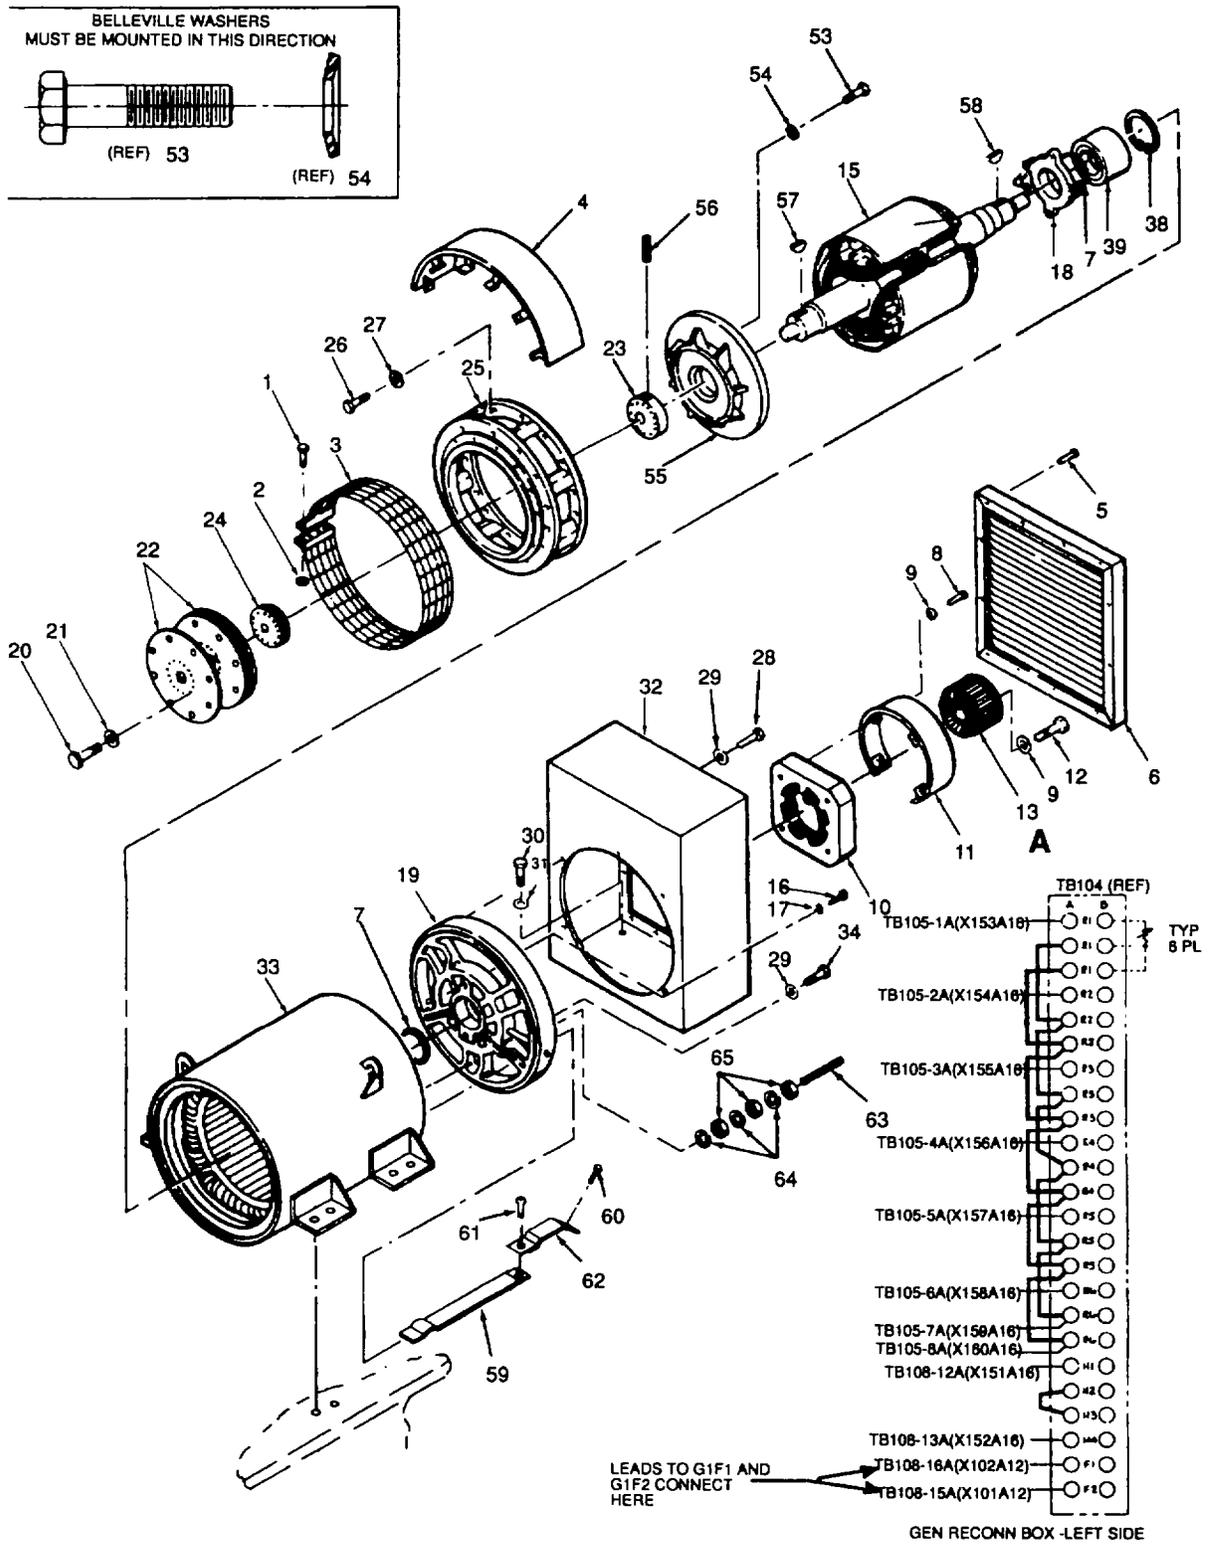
Generator G1 and Related Parts (Sheet 1 of 3)
